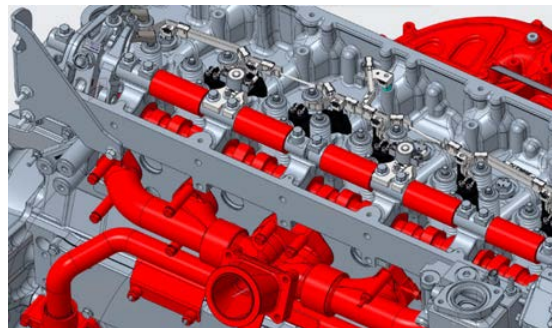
SCE camshaft configuration with rocker arm spacers for cylinders #1 - #5.
